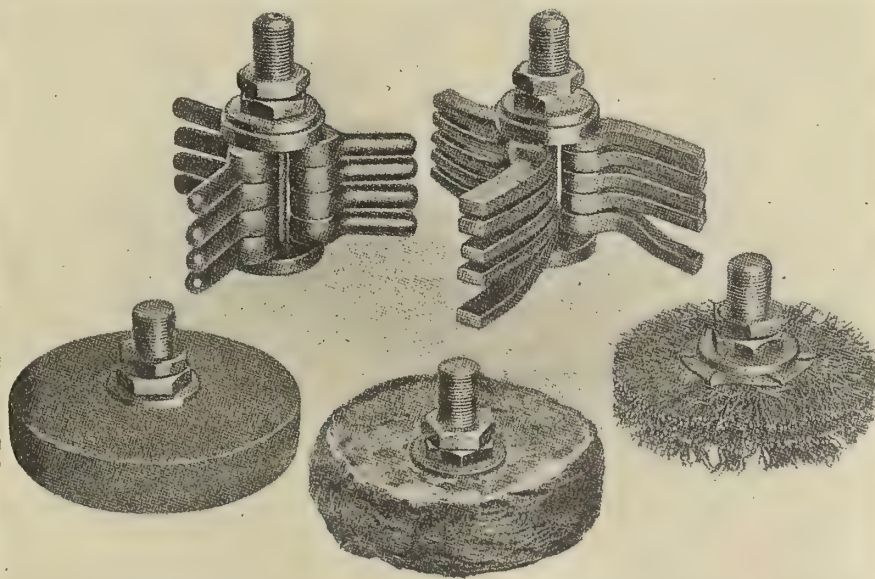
Hammers, Emery Wheels and Brushes Used on the Rotary Scraper
